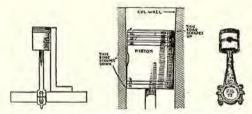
(left). A ground arbor and a square can be used to check up the alignment of the connecting-rod and piston assembly if a special fixture is not available. This should be done both before and after scraping the bearings. A spirit level should be used to level top of piston. Blade of square should touch piston skirt at exact center.
